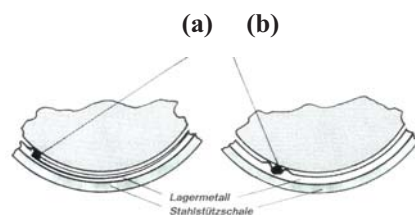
The pattern of the damages of the sliding surface bearings caused through strange bodies: (a) pumps through grains and the rifling of the sliding surface, (b) polishing shaft neck through grains fixed in the sliding layer [14]
